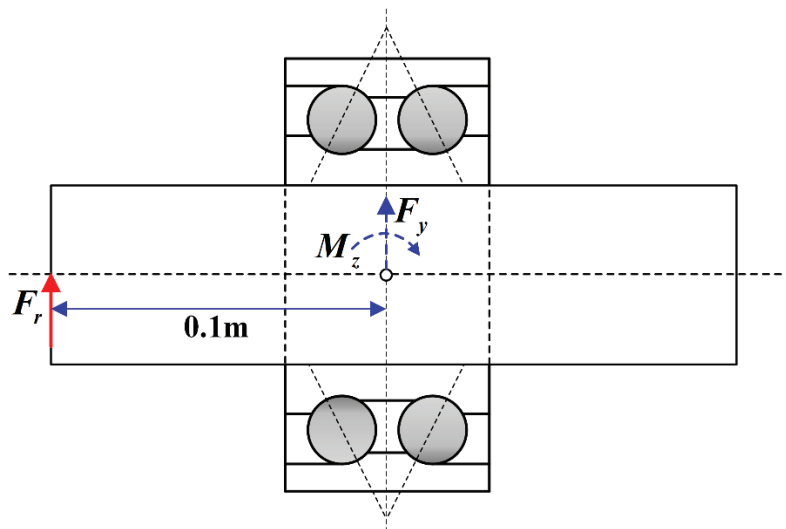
The schematic diagram of a rigid rotor system supported by the double-row ball bearing.
